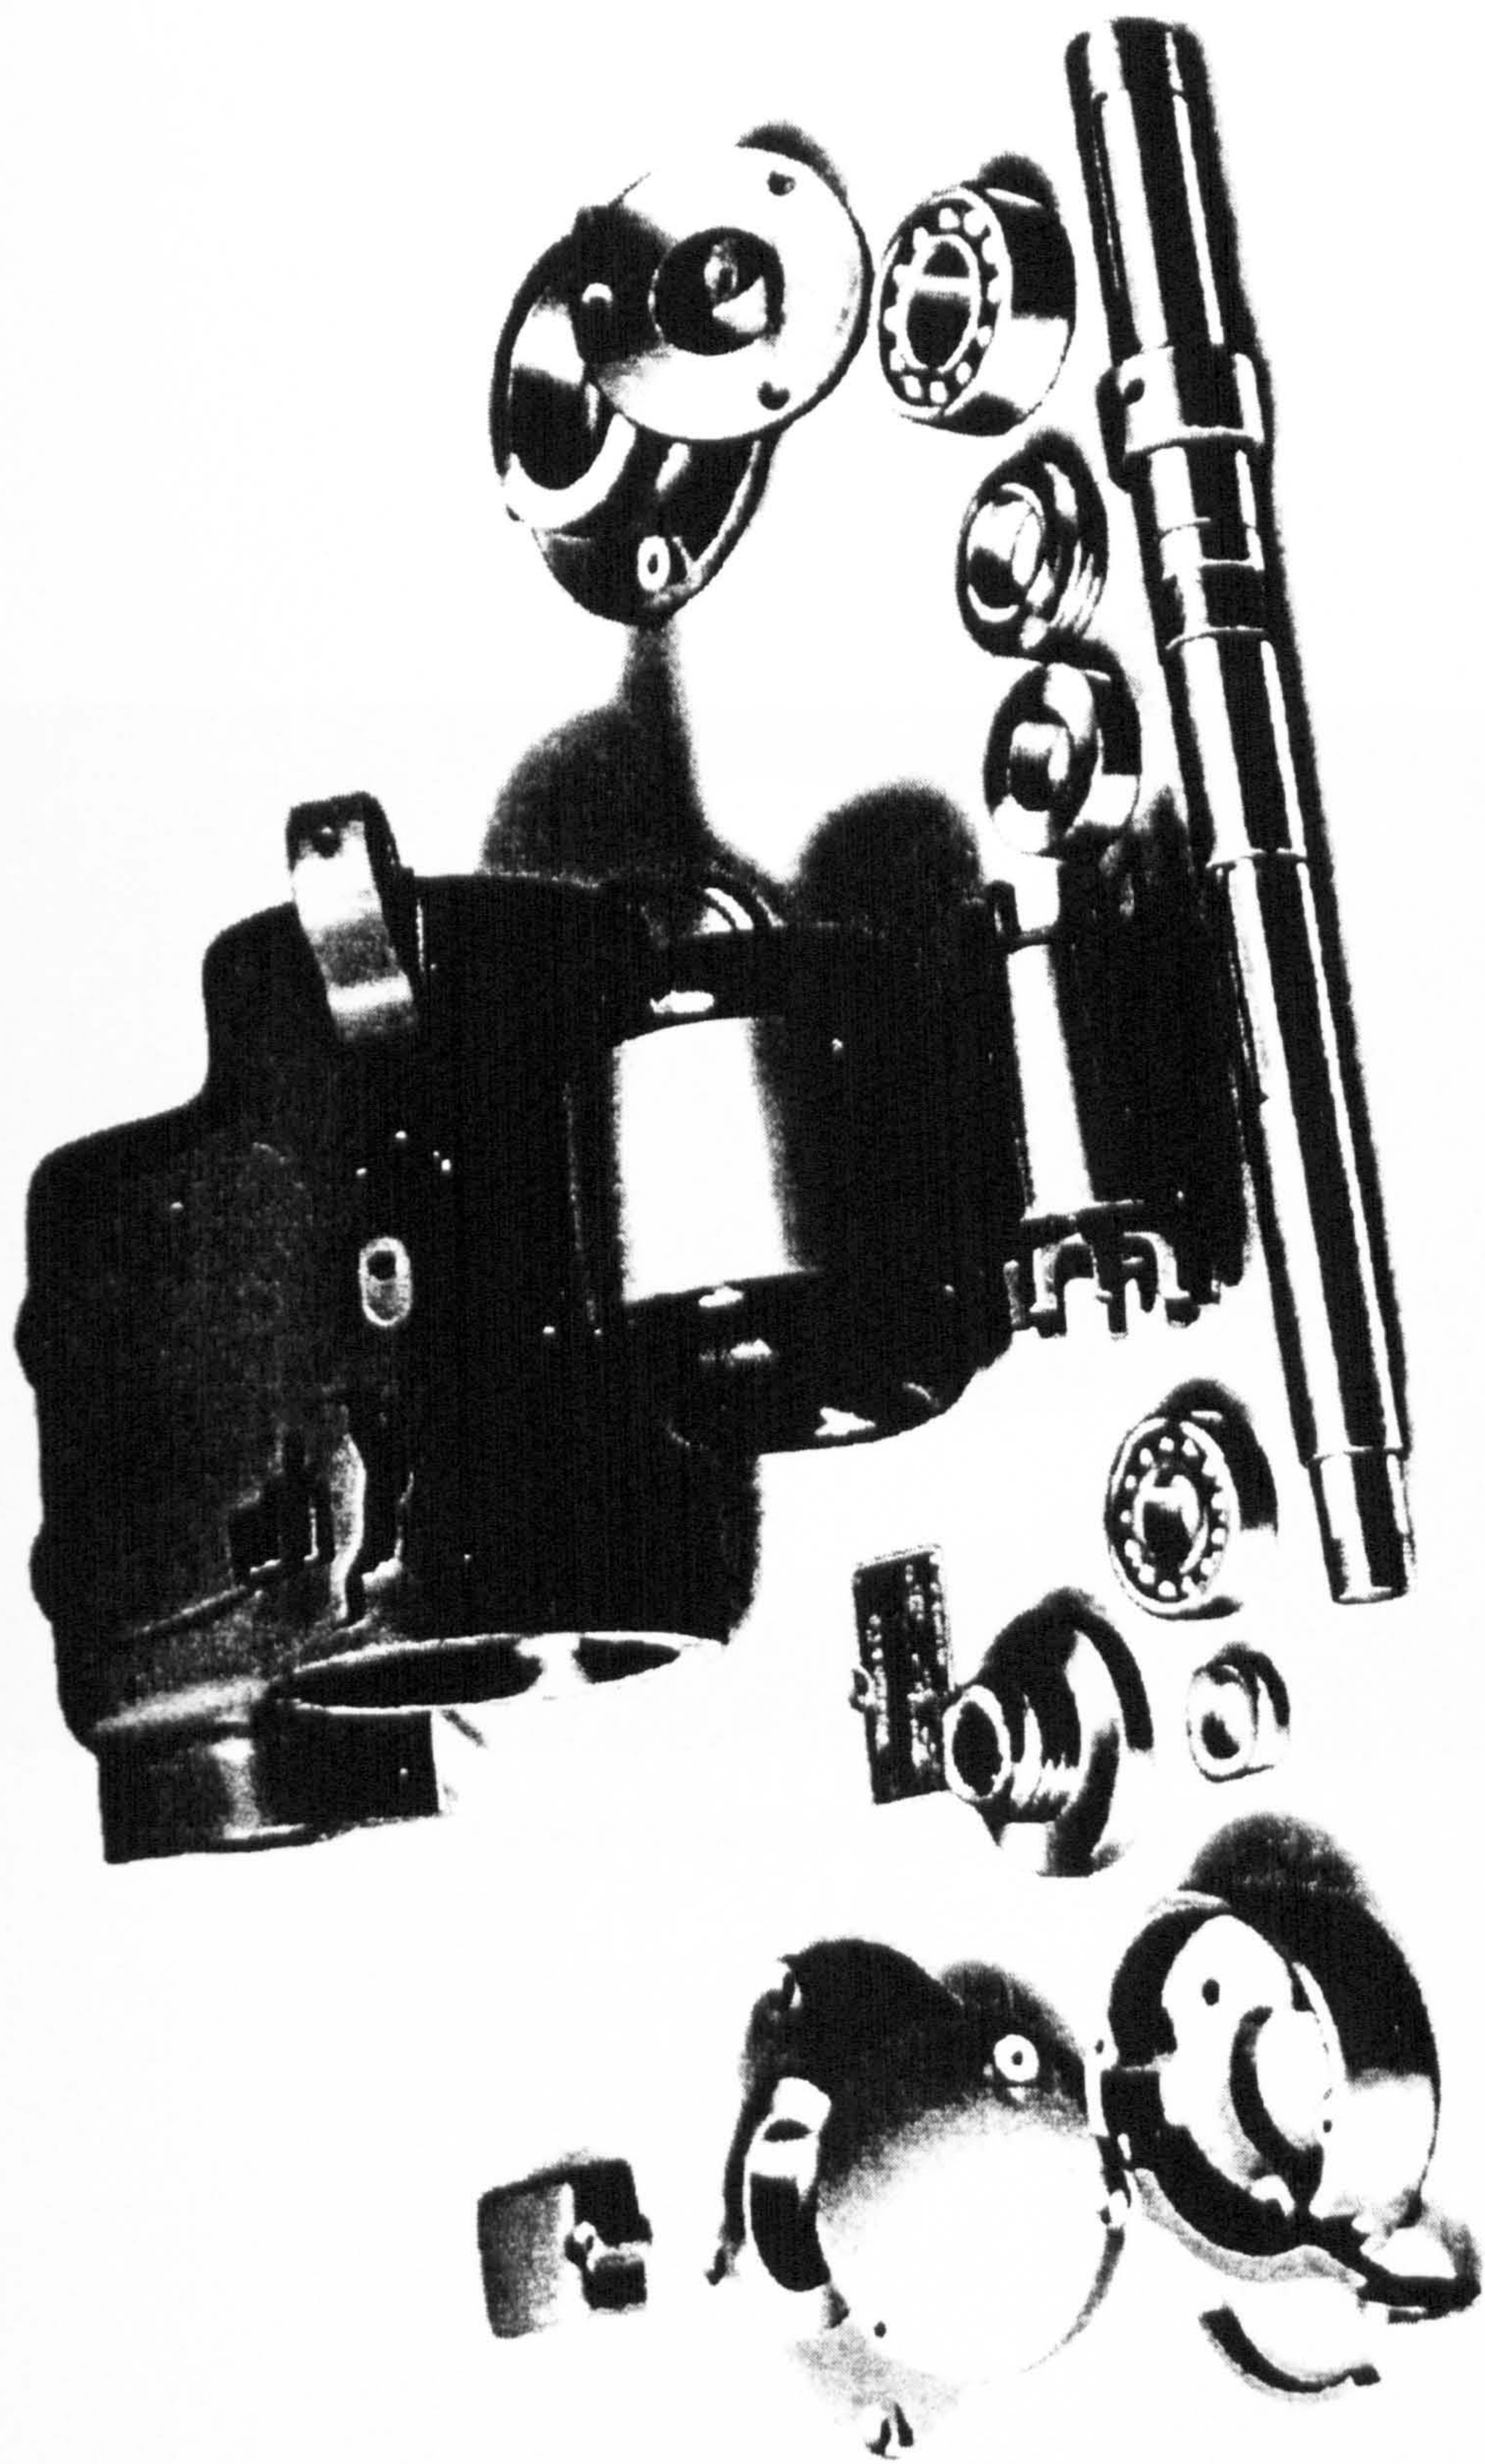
Elements of a Motorised Cutterhead with Spindle and Bearings
